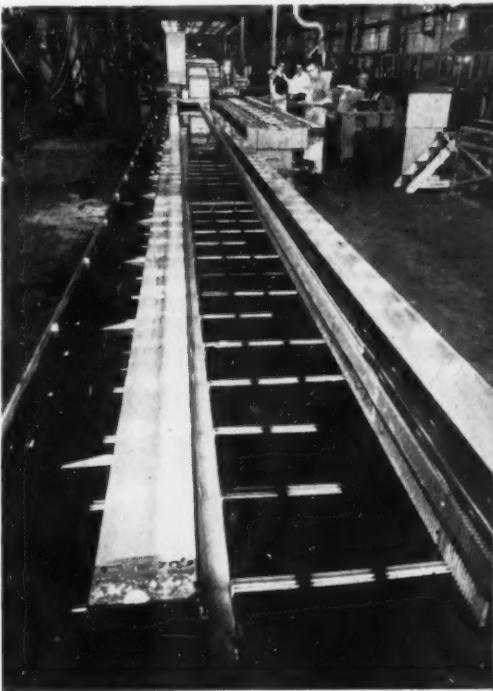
Overhead lights are reflected in the oil pan of a machine which is designed to perform 250 operations in the manufacture of copper conductor bars for generators for large steam turbine-generator units.
